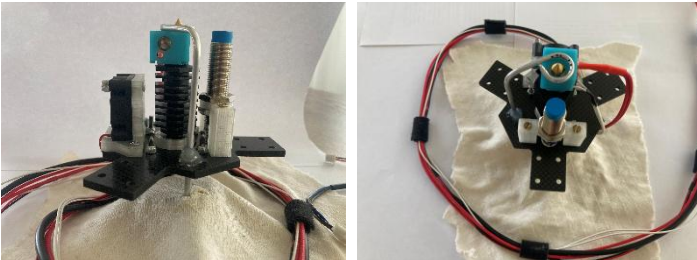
End platform equipped with an extruder, a fan, and an inductive sensor
